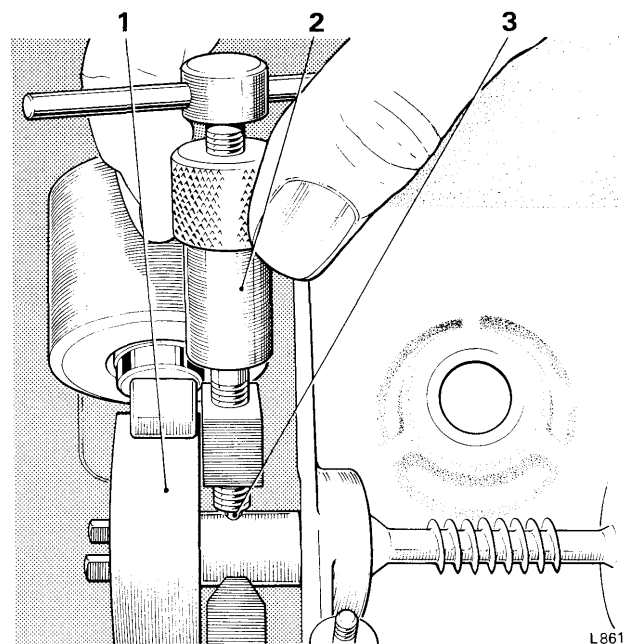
FITTING THE BRAKE DRUM ROLL PIN
